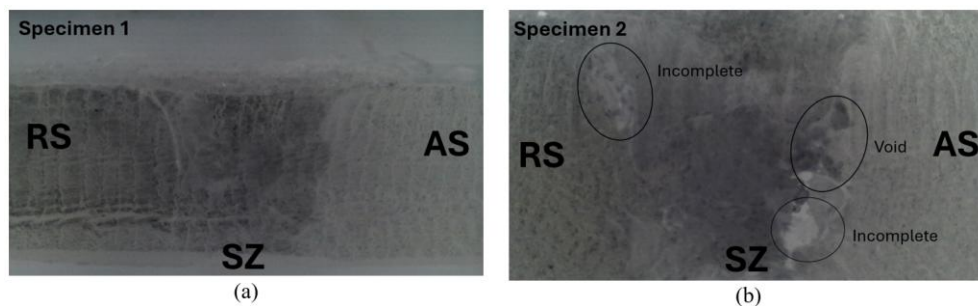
(a) Photo of macro structure of FSW result of conical groove tool specimen 1, (b) Photo of macro structure of FSW result of conical groove tool specimen 2
